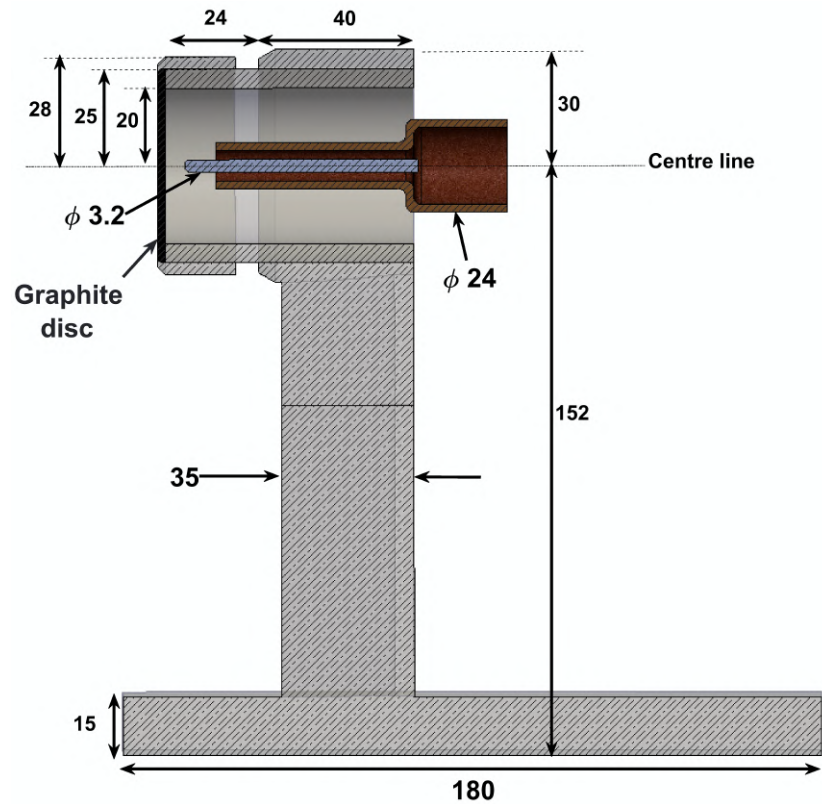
Dimensions of experimental probe with a 50 mm diameter carbon disc.
